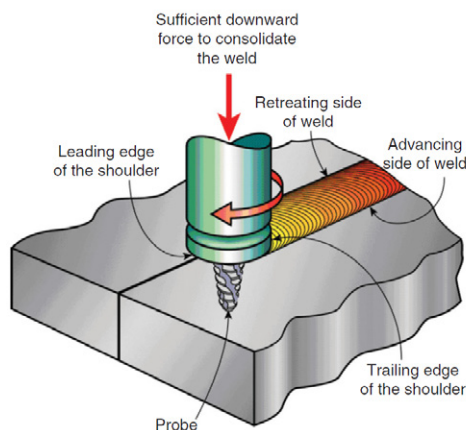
Single-sided stir friction welding site. Image courtesy of TWI.
